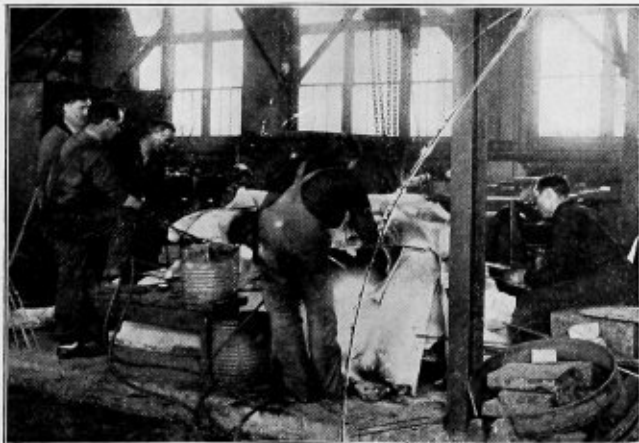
Welding Casting in Temporary Furnace
